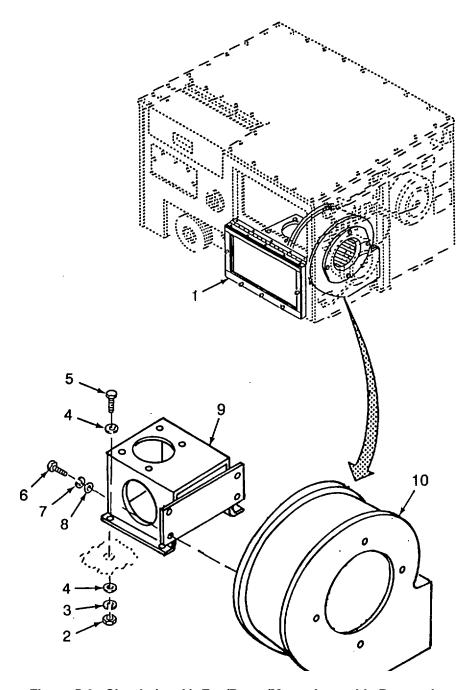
Circulating Air Fan/Pump/Motor Assembly Removal
